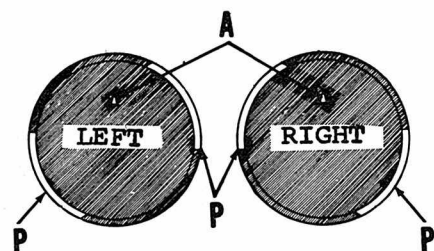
Pistons must be installed with ports (P) and arrows (A) arranged in this manner.
